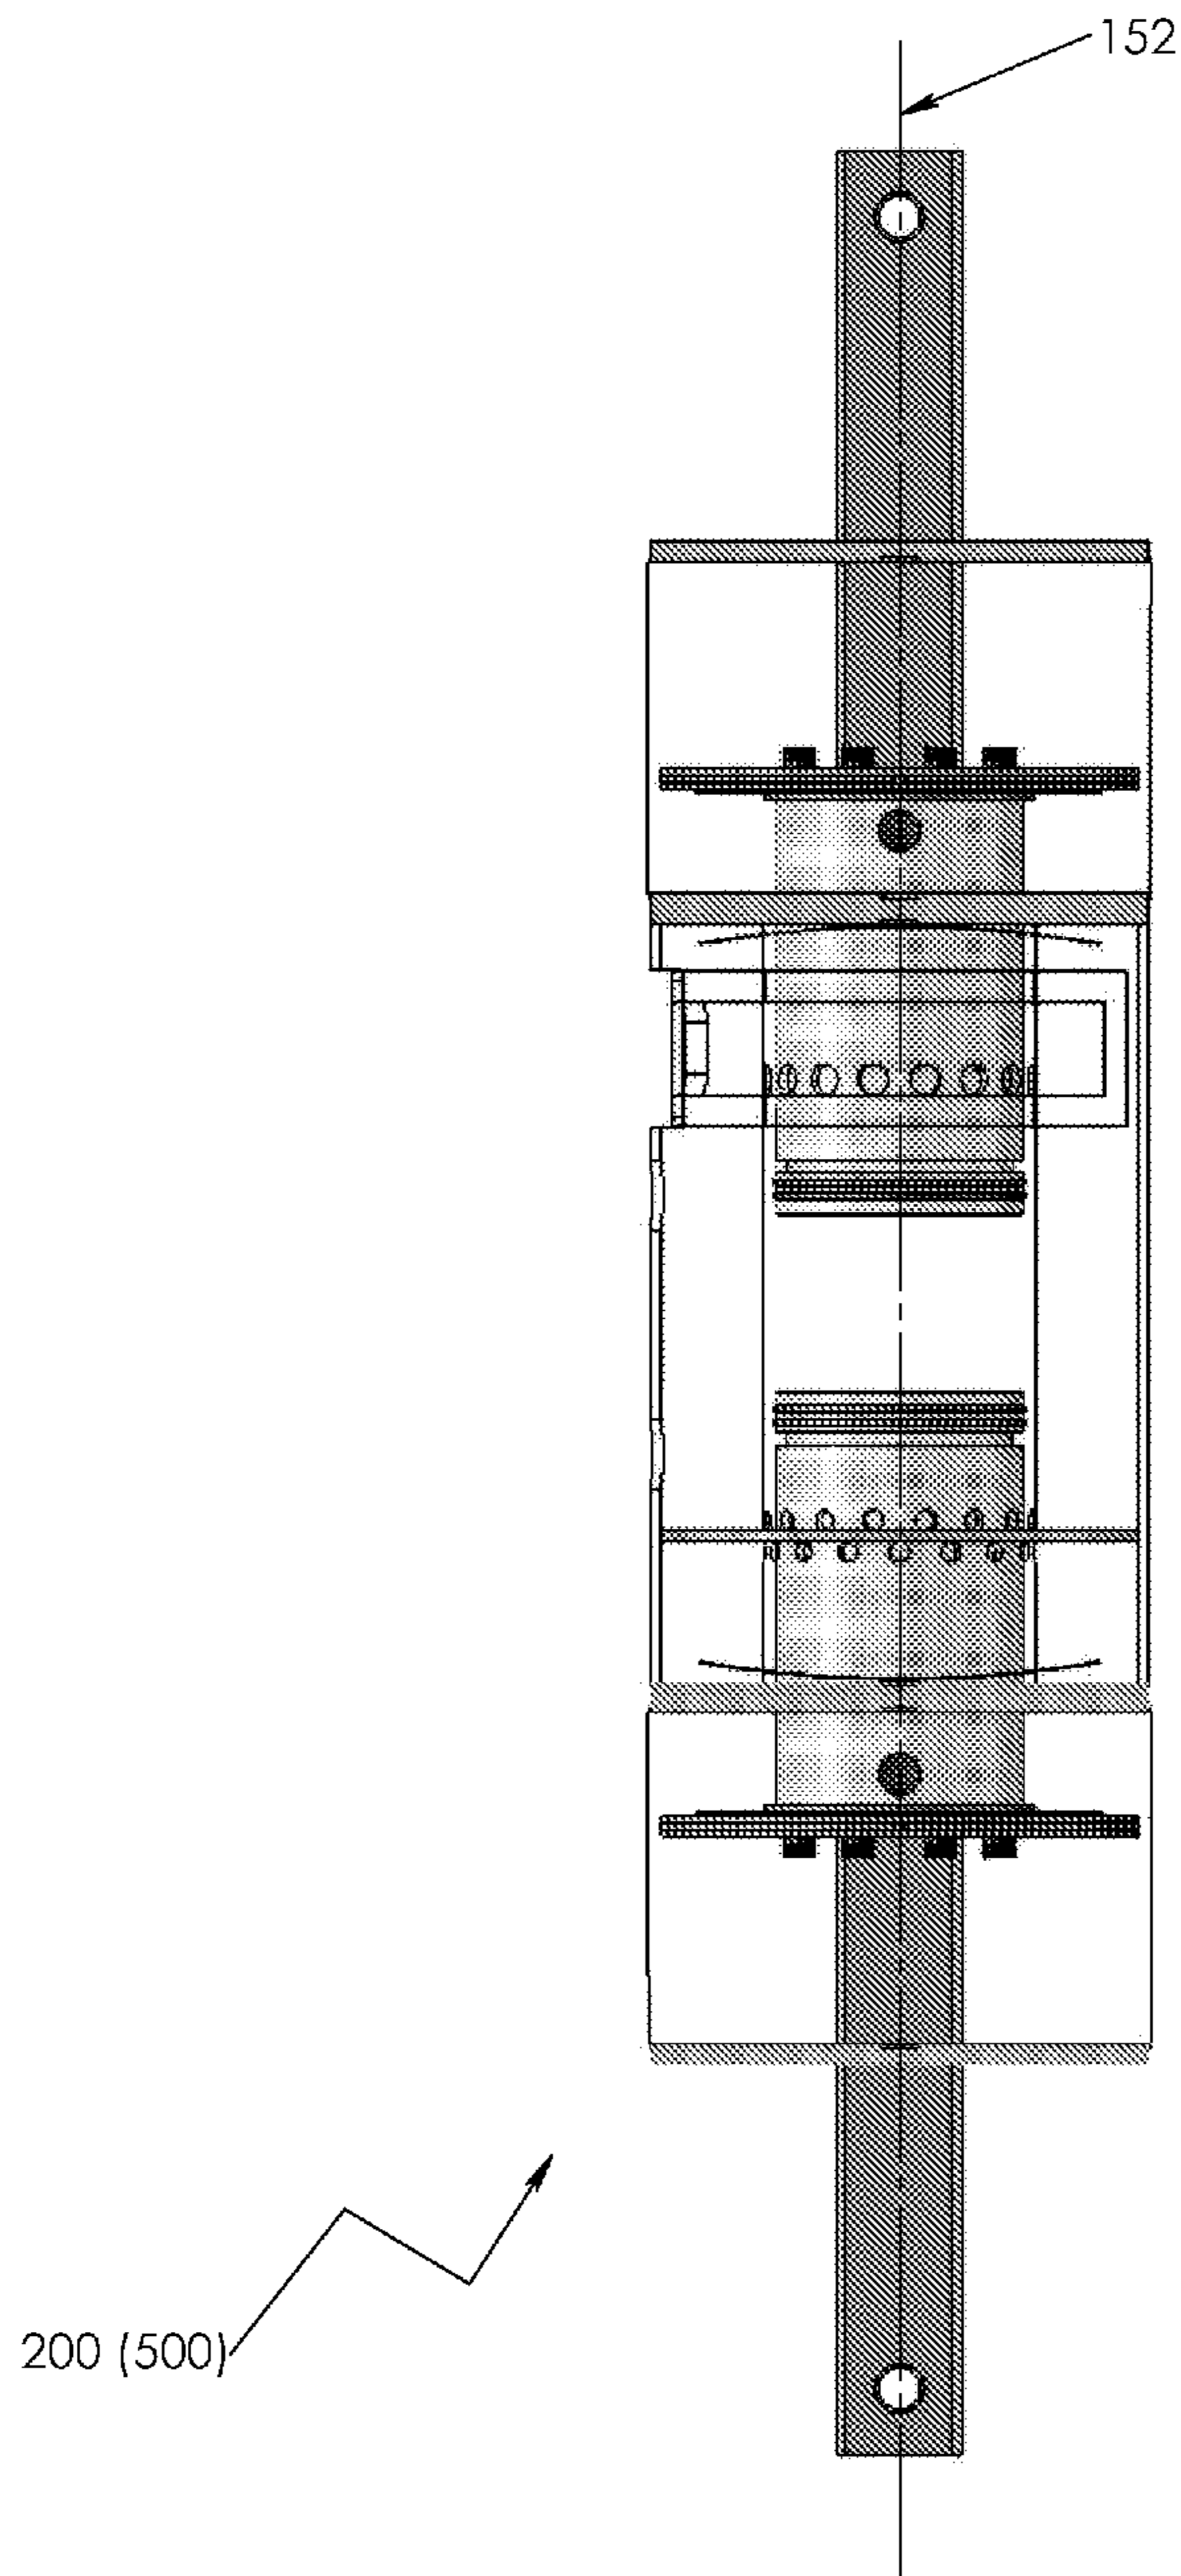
G. SIDE, CROSS-SECTIONAL VIEW OF COMBUSTION ASSEMBLY DURING ENGINE CYCLE
